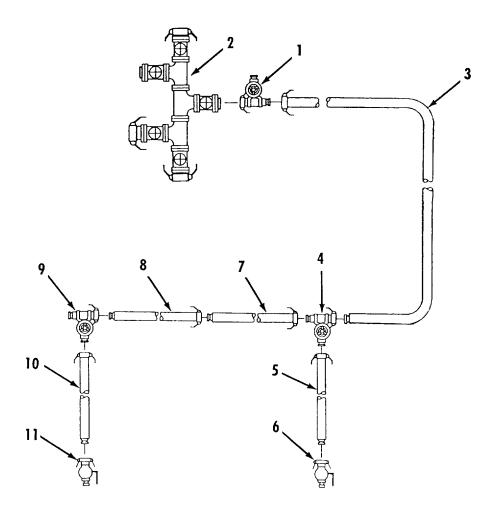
Fuel System - Fueling Manifold with Five Valves to Bottom Loading Points Removal.
